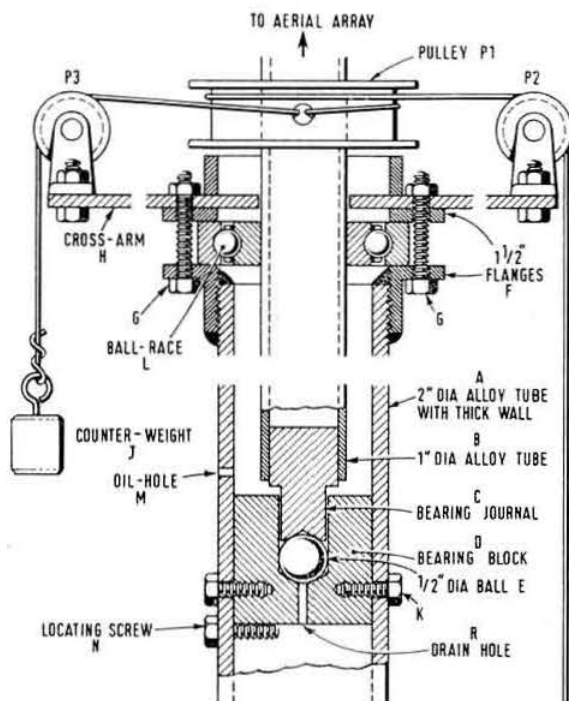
Sectional views of the rotating mechanisms for the mast.
